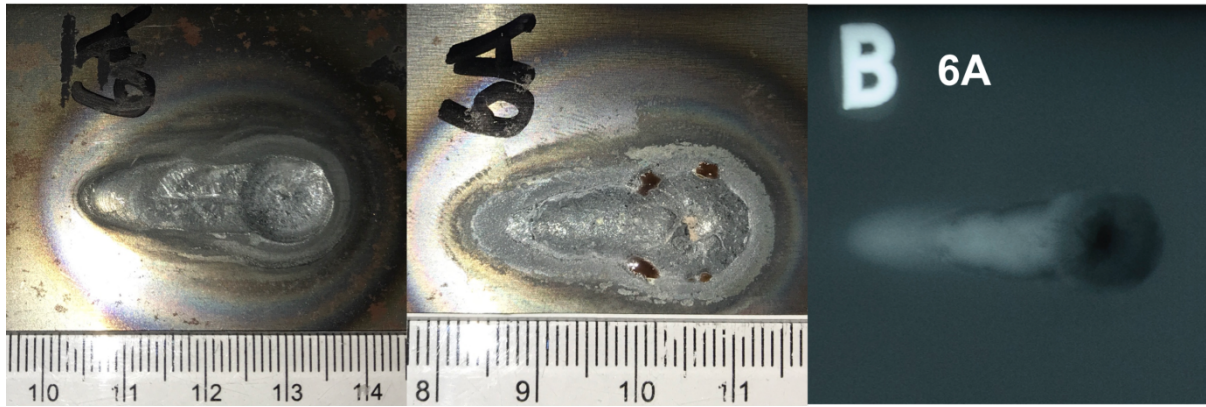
Photographs of weld cap/ root of trial 6A and radiographic inspection result.
